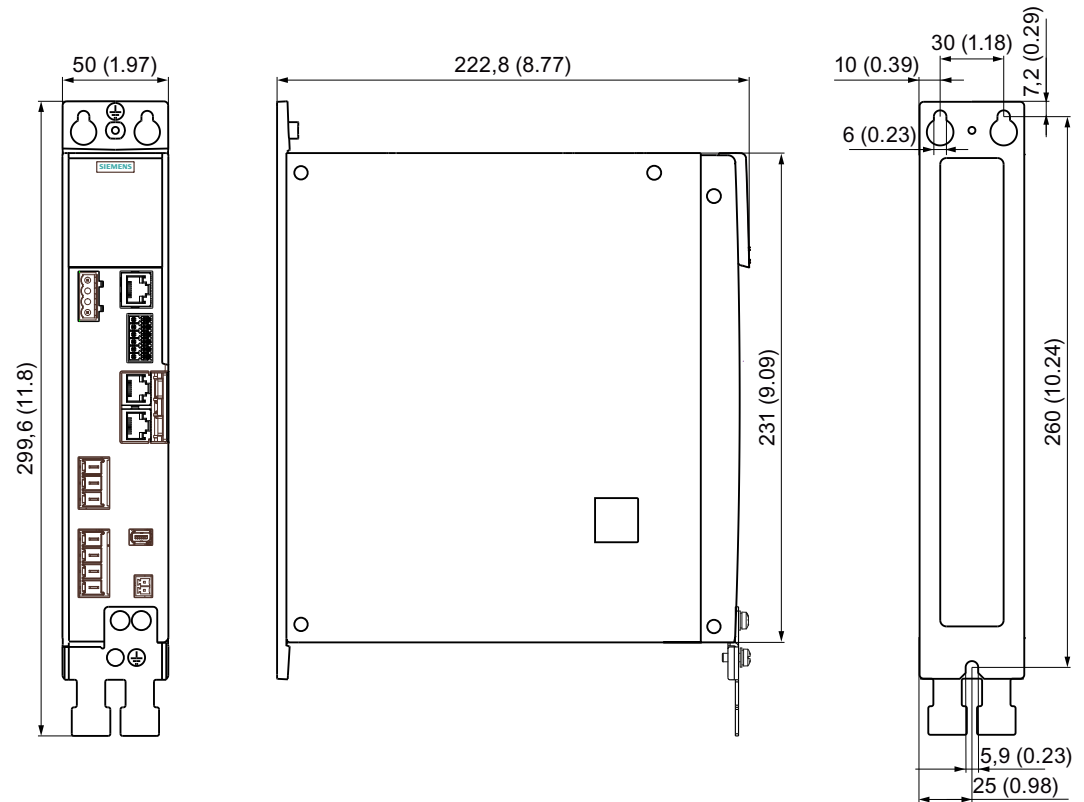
Dimension drawing SINAMICS S210 FSA, 3 AC, dimensions in mm (inch)
